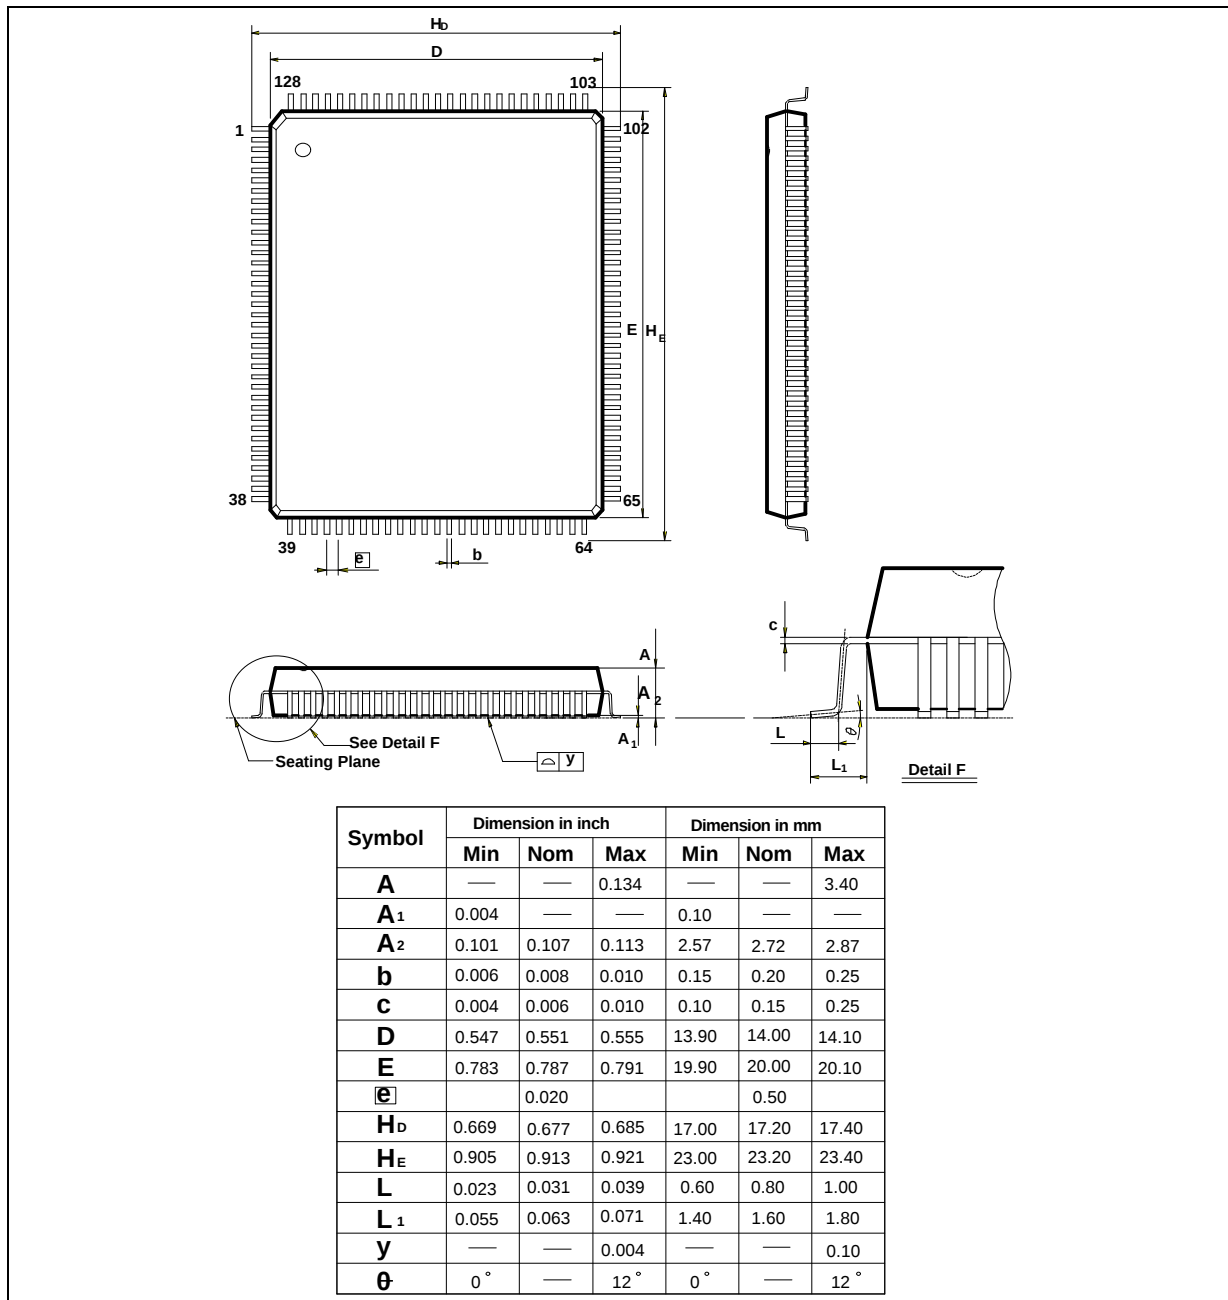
128L QFP (14x20x2.75mm footprint 3.2mm) Dimensions
